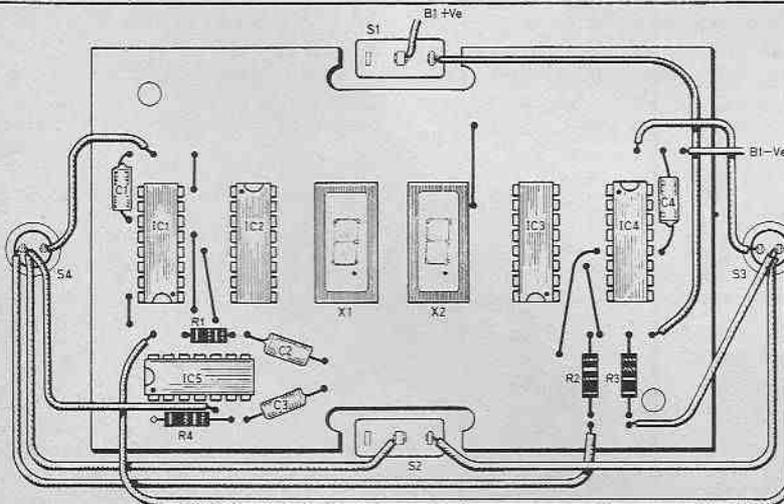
Layout of the components on the topside of the board and wiring-up details.
